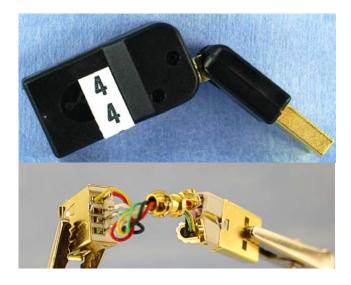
USB Swivel Adapter with plastic overmold and with plastic overmold removed.
